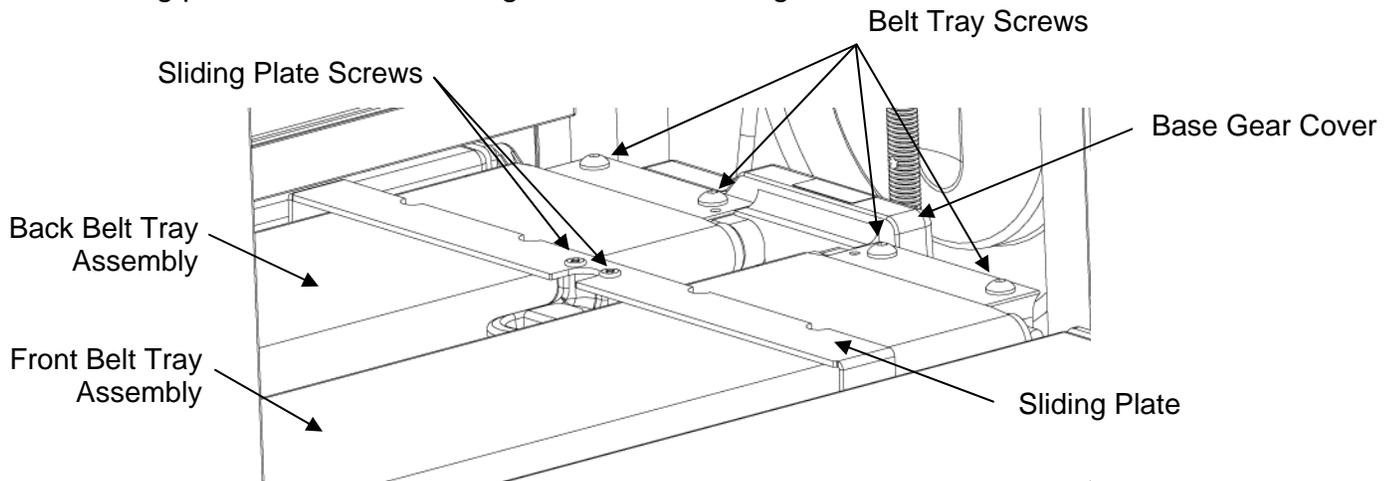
VIEW OF THE SLIDING PLATE AND BELT TRAY SCREWS (RIGHT SIDE)
